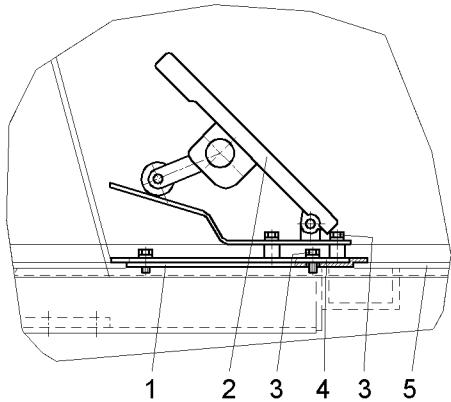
Installation of brake pedal of auxiliary brake:
